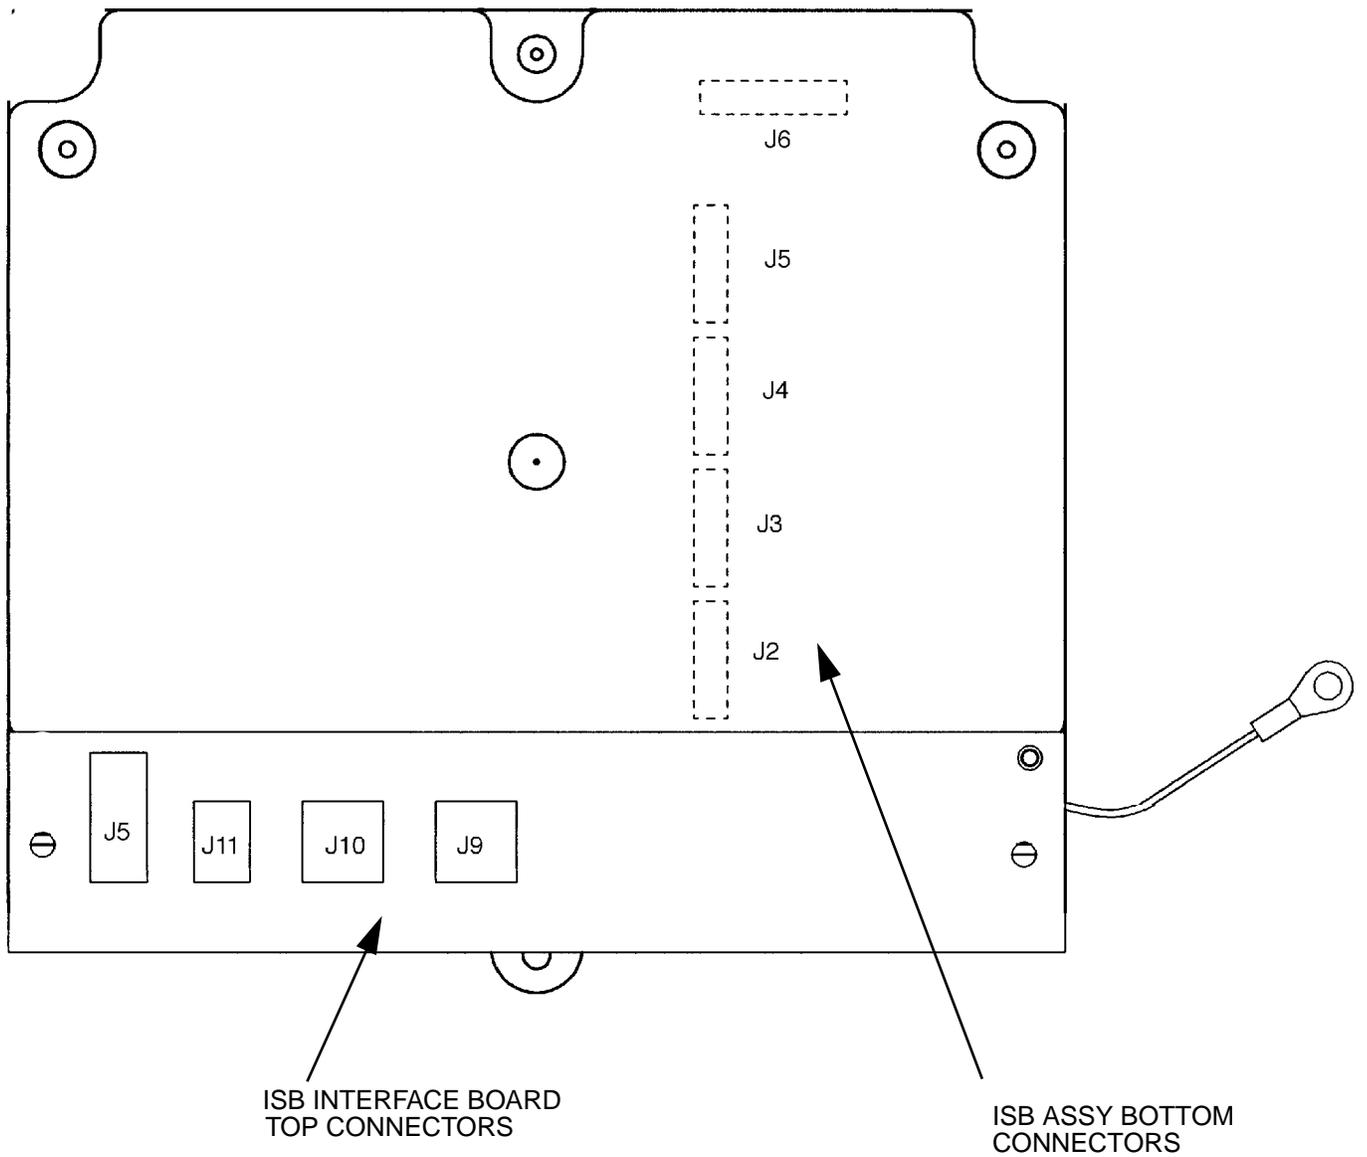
ISB ASSEMBLY BOTTOM CONNECTOR PINOUTS . Refer to Table A-1.
